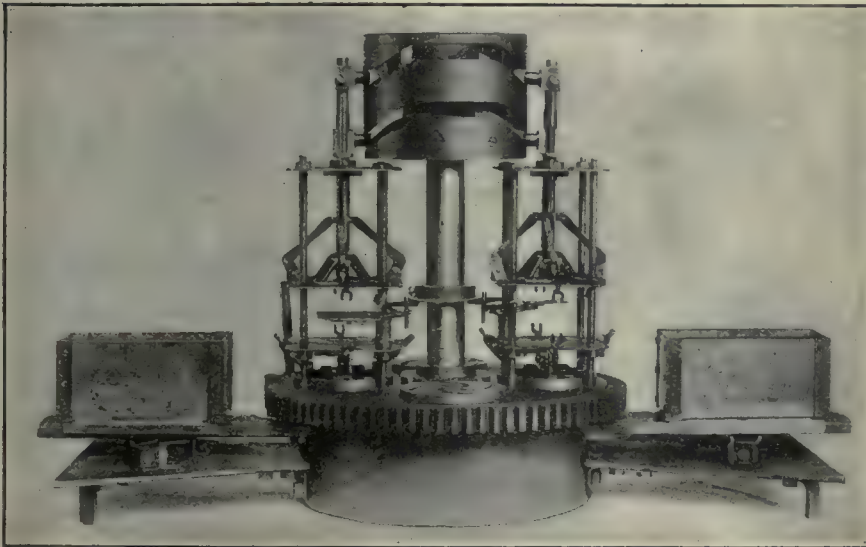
AUTOMATIC MULTIPLE DIE-CASTING MACHINE
